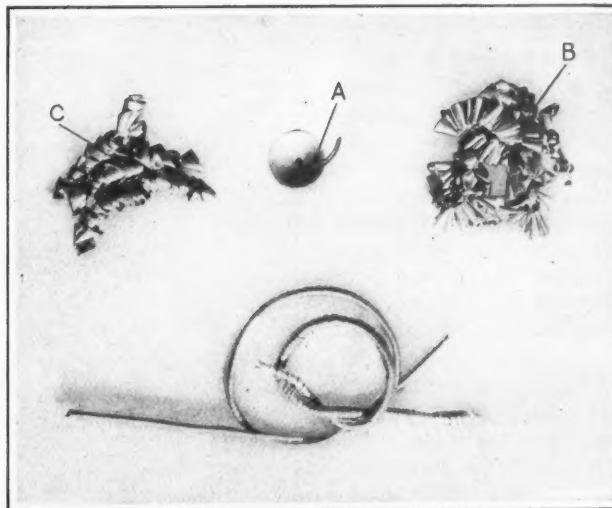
Samples of Turning and Drilling Chips and Disk A removed when "drilling for a wire"
